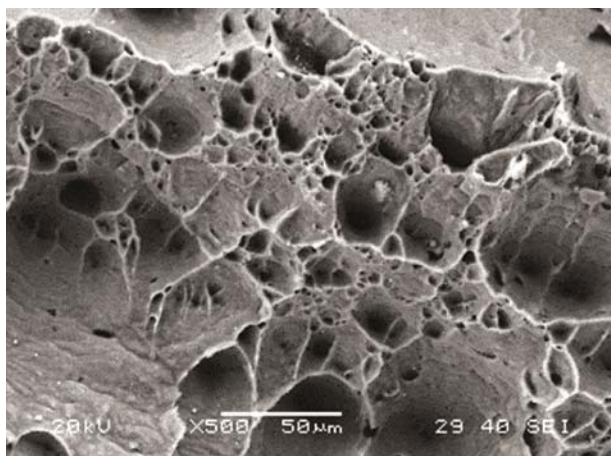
Magnified view of area 1 in weld 16.
